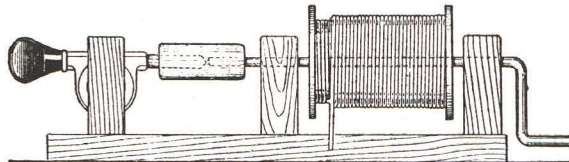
ATTACHED TO WOODEN WINDING JIG
